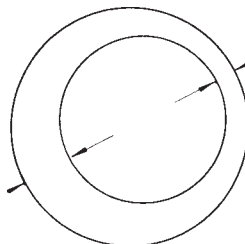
Thinnest and Thickest Wall of a Cross Section When the Insulation is Not Below the Conductor Surface
